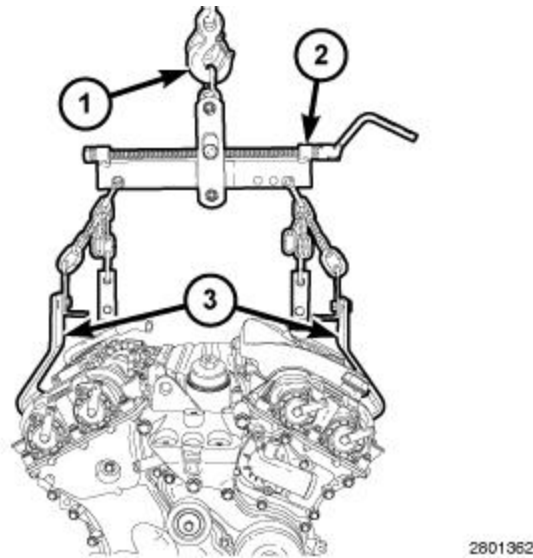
Lifting Sling, Engine Lifting Brackets & Engine Hoist
